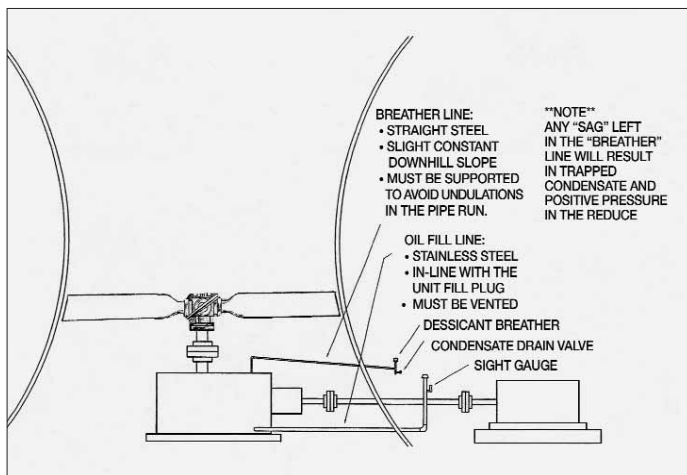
Cooling Tower Gear Drive Breather and Oil Level Sight Glass Modifications.
